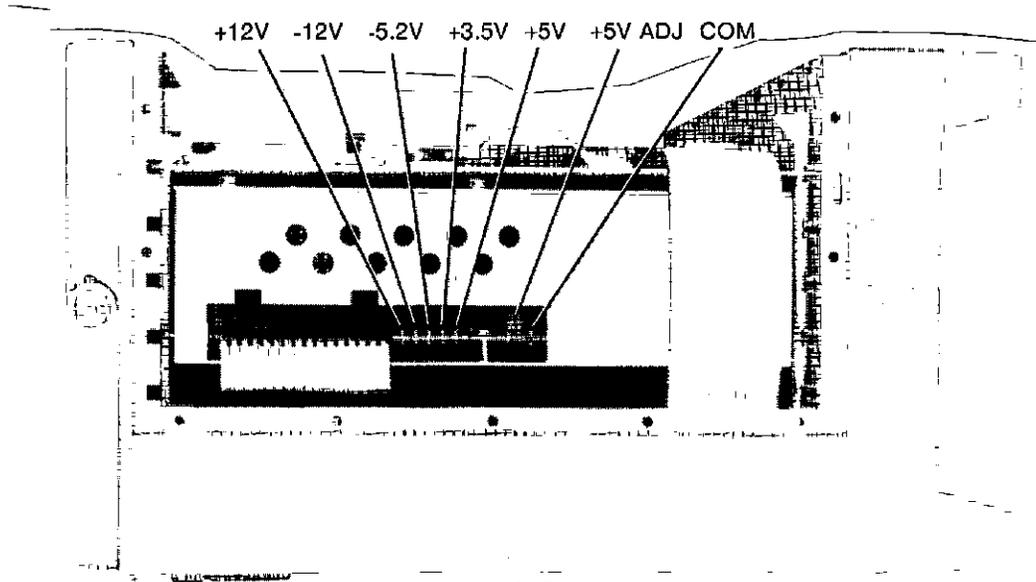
HP 1650A/51A Power Supply Assembly I Testpoints and Adjustment Location
